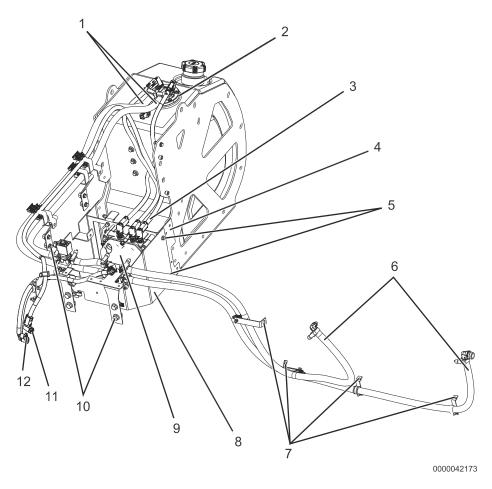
Diesel Exhaust Fluid (DEF) Tank Heater Valve.
